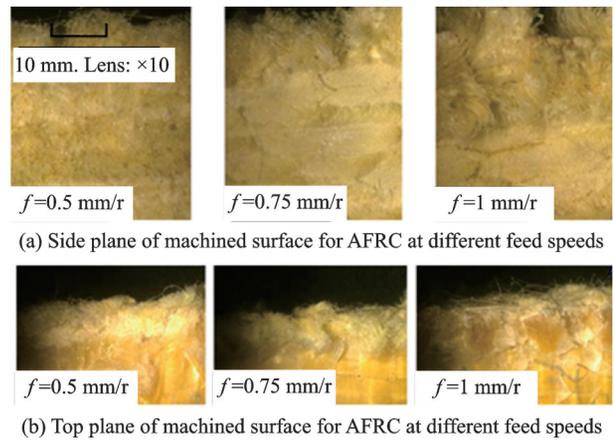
Delamination defects for AFRC for machining directions at 45°
